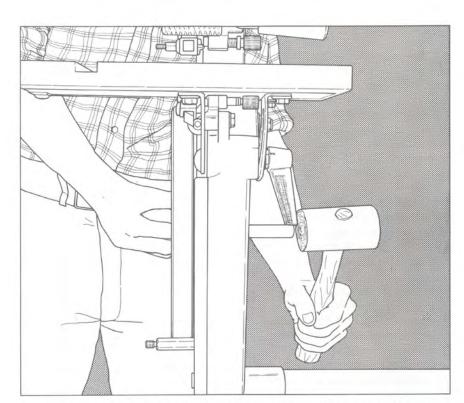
To remove the drive wheel, remove the drive hub and bearing retainer. Then tap the drive shaft with a mallet and pull the wheel free of the bandsaw frame.
